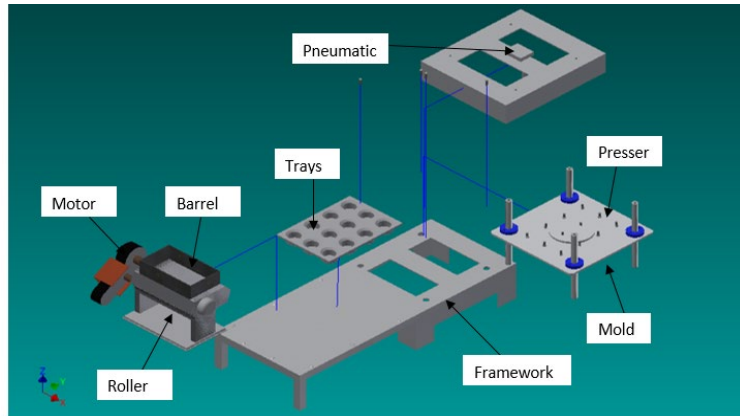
Design 3D of Prototype Tartlet Shell Maker Machine
